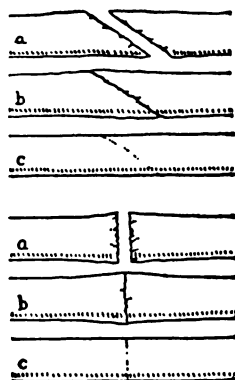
Three stages in lap welding (above), and butt welding (below): a the ends roughly shaped then upset; b the fresh, enlarged weld; c the weld hammered down to the size of the rest of the bar.
